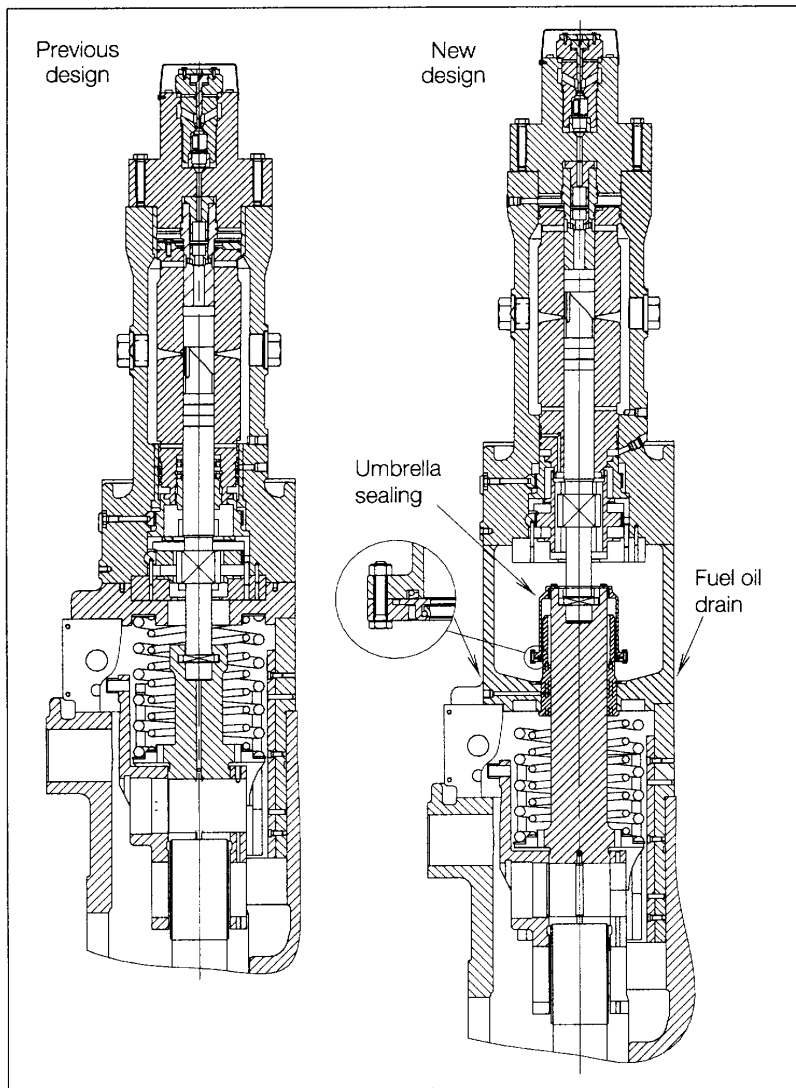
Previous type and new umbrella-type of fuel injection pump
